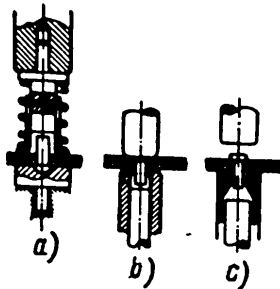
Centering of Rivets with Reference to the Dies in Press Riveting
